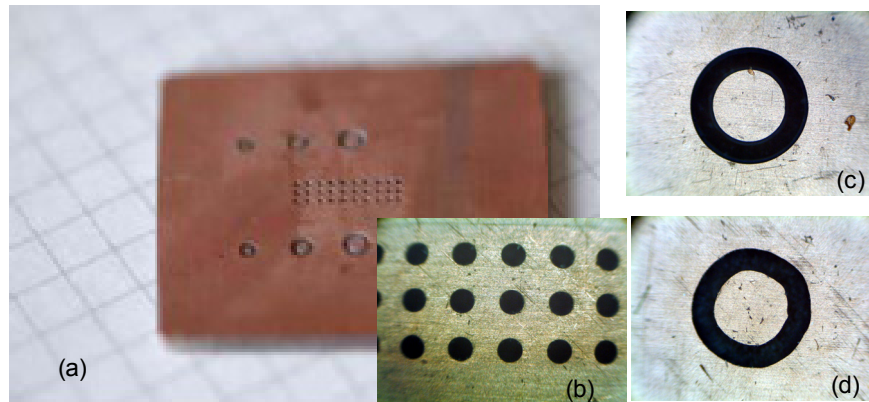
(a) Cu Plated PCB workpiece with machined holes (b) close-up of holes, (c) circle with island at 40 mm/min and (d) circle with island at 160 mm/min. While (c) does not show any significant error during quadrant reversal, (d) shows quadrant reversal error.
